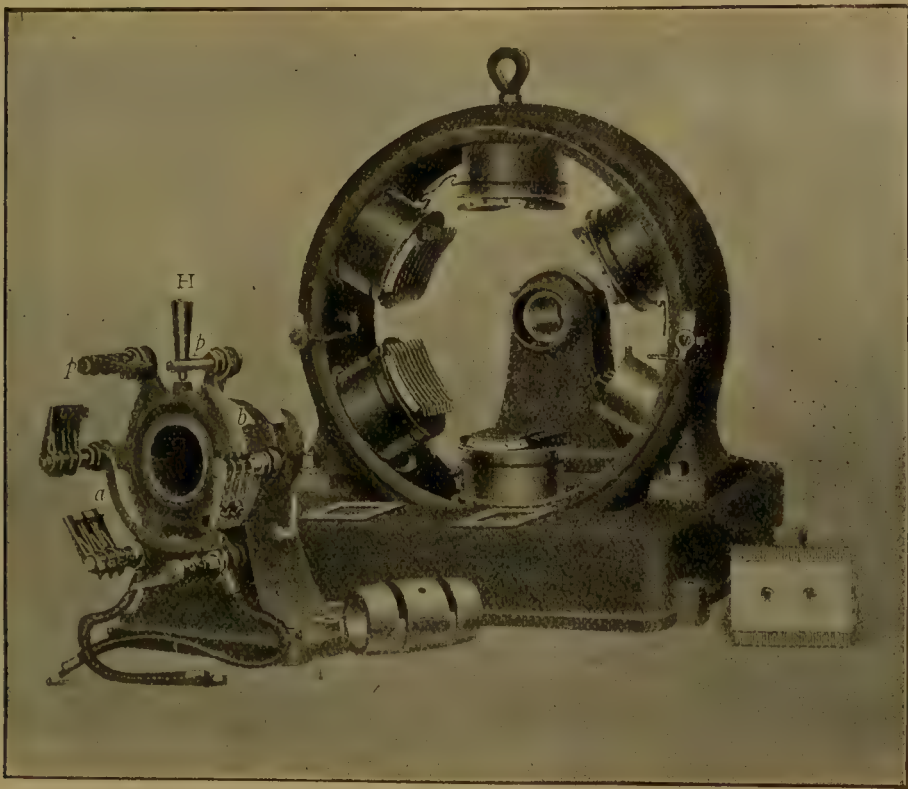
Field Magnets and Brush Gear of Six-pole Dynamo.
